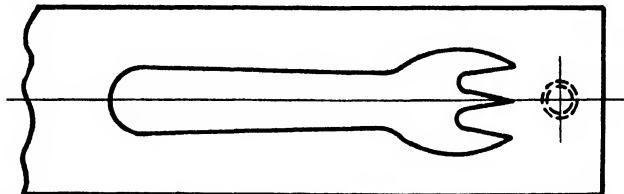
A blanking die poorly designed. Crack will occur from point of fork prong to set screw hole. The position of the set screw hole should be changed to eliminate cracking.
